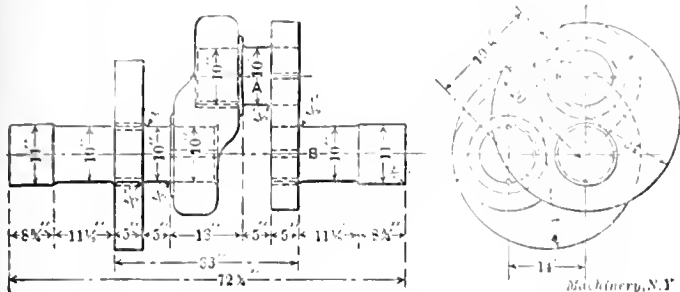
Crank-axle, the Plane of which are turned by the Tool
